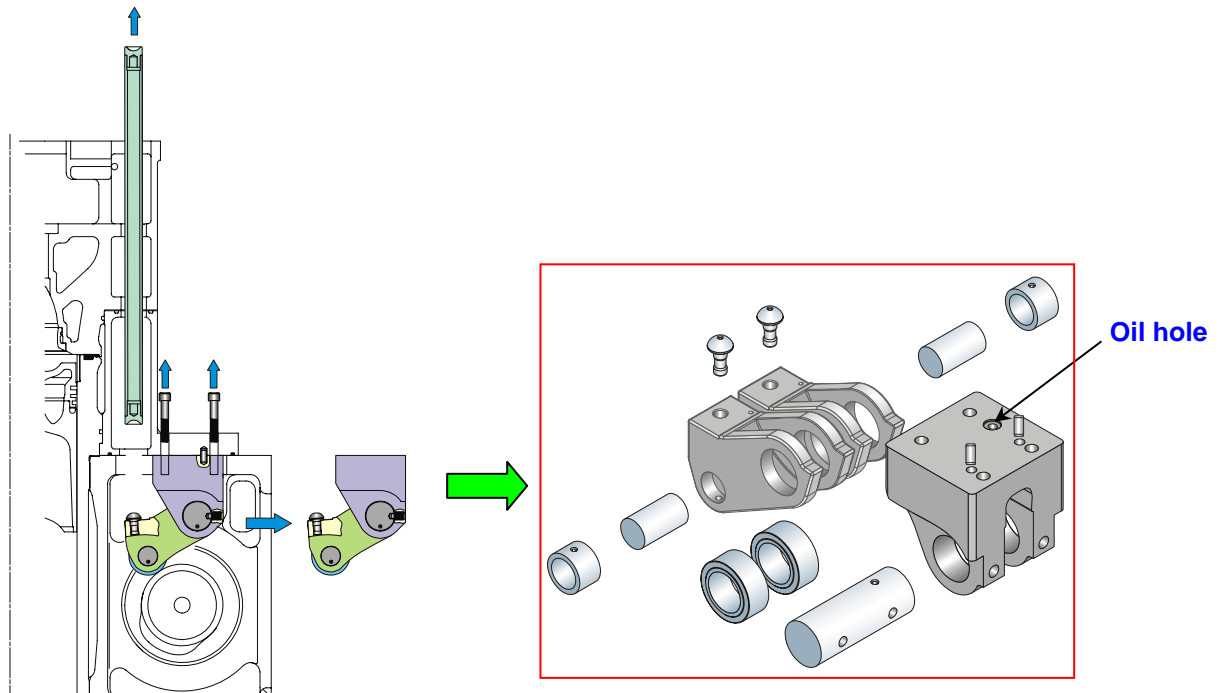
Dismantling of a swing arm assembly (스윙 암 어셈블리의 분해)
